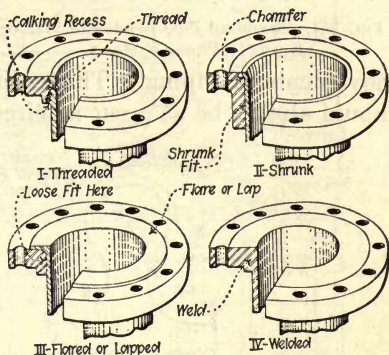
Methods Of Securing Companion Flanges To Pipe Ends.
